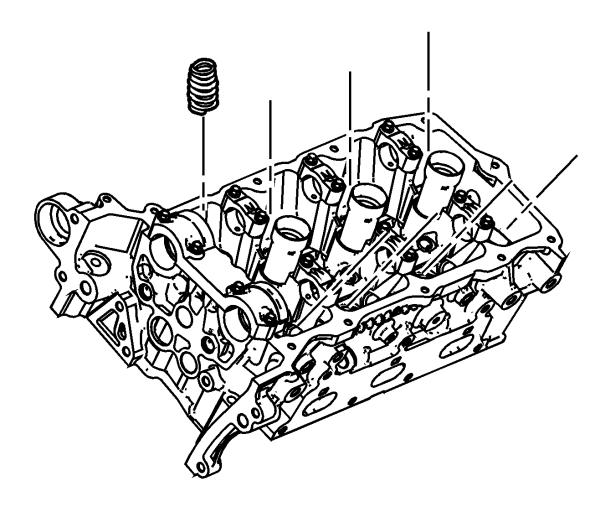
View Of Valve Spring Courtesy of GENERAL MOTORS COMPANY
